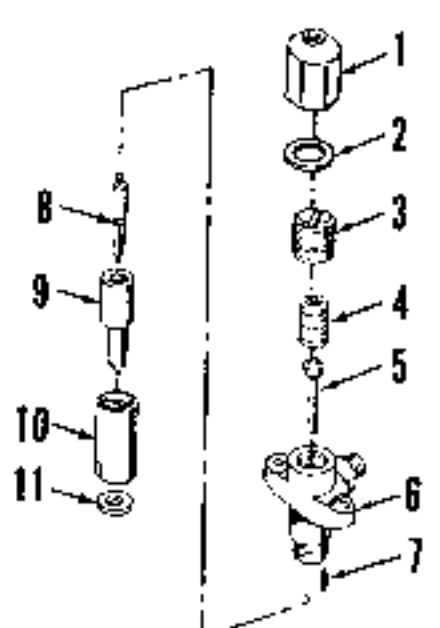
Exploded view of typical C.A.V. injector nozzle and holder assembly
